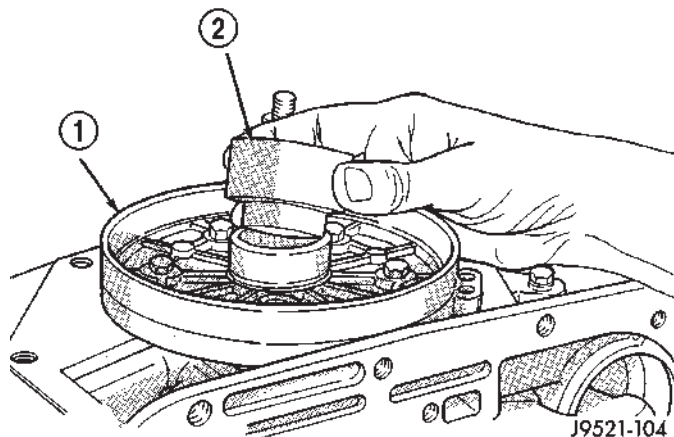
Positioning Adapter Tool In Overdrive Piston Retainer
